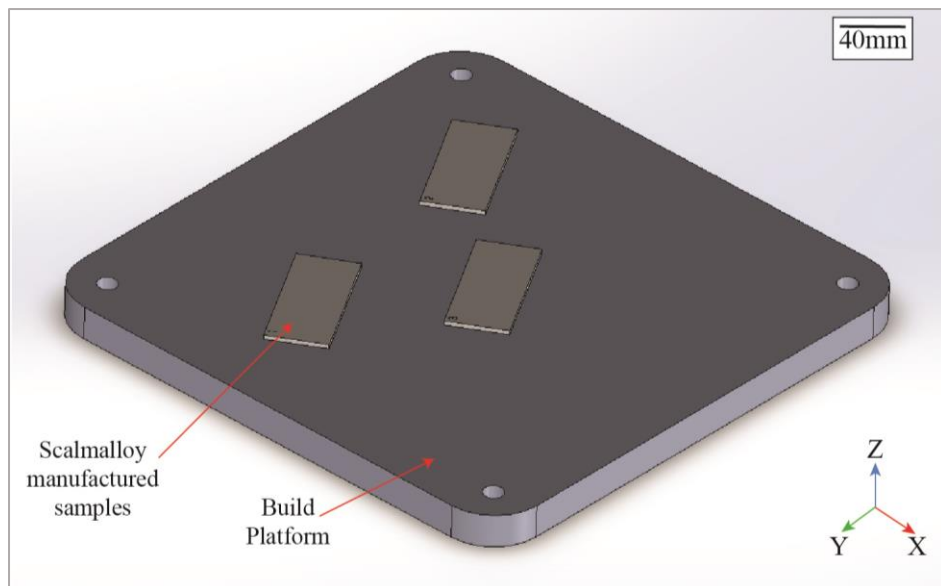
Scalmalloy samples for welding on build platform – units are in mm
